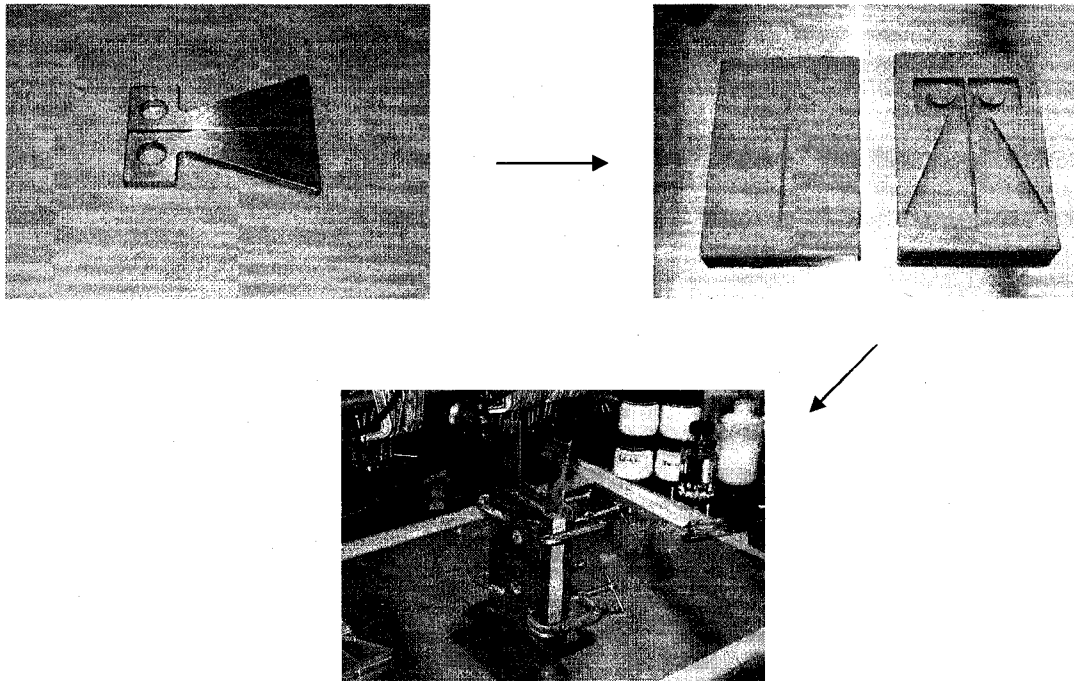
Molding process used to make epoxy TDCB specimens.
